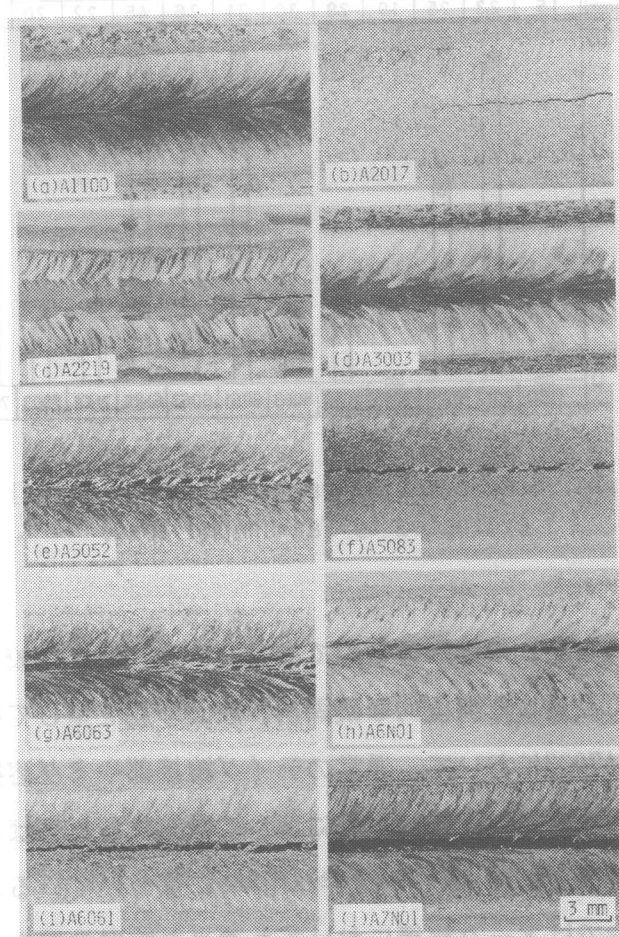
Macrostructures of weld bead surface of Houldcroft type test specimen.
